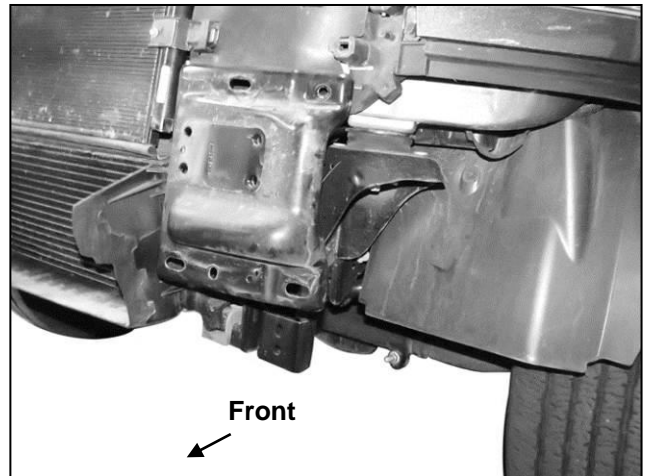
Remove hex nuts from bumper bolts (arrows). Bumper bracket pictured from below/behind bumper
